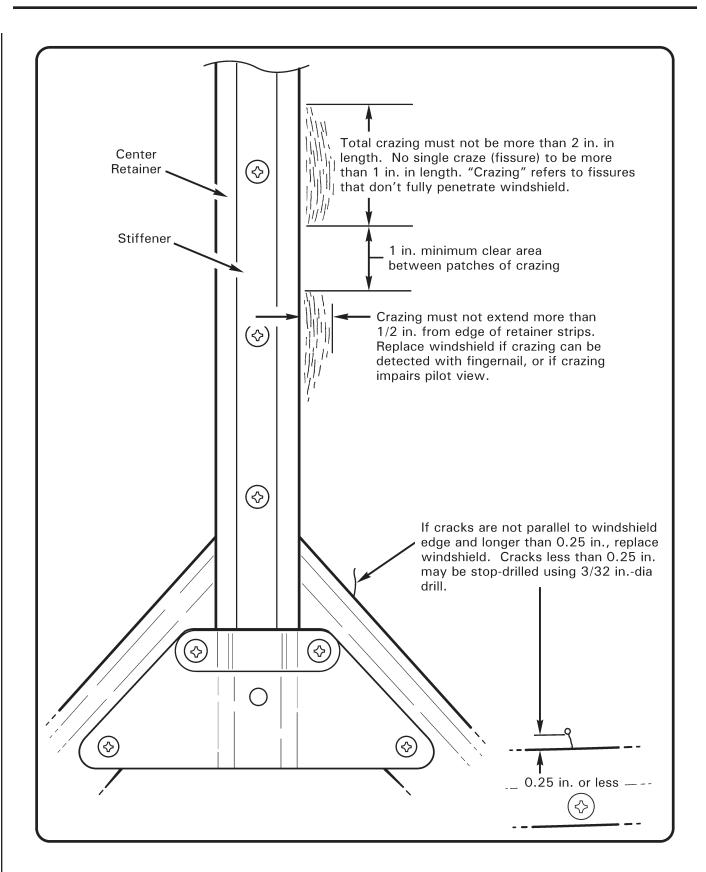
WINDSHIELD INSPECTION (ACRYLIC WINDSHIELD SHOWN)
